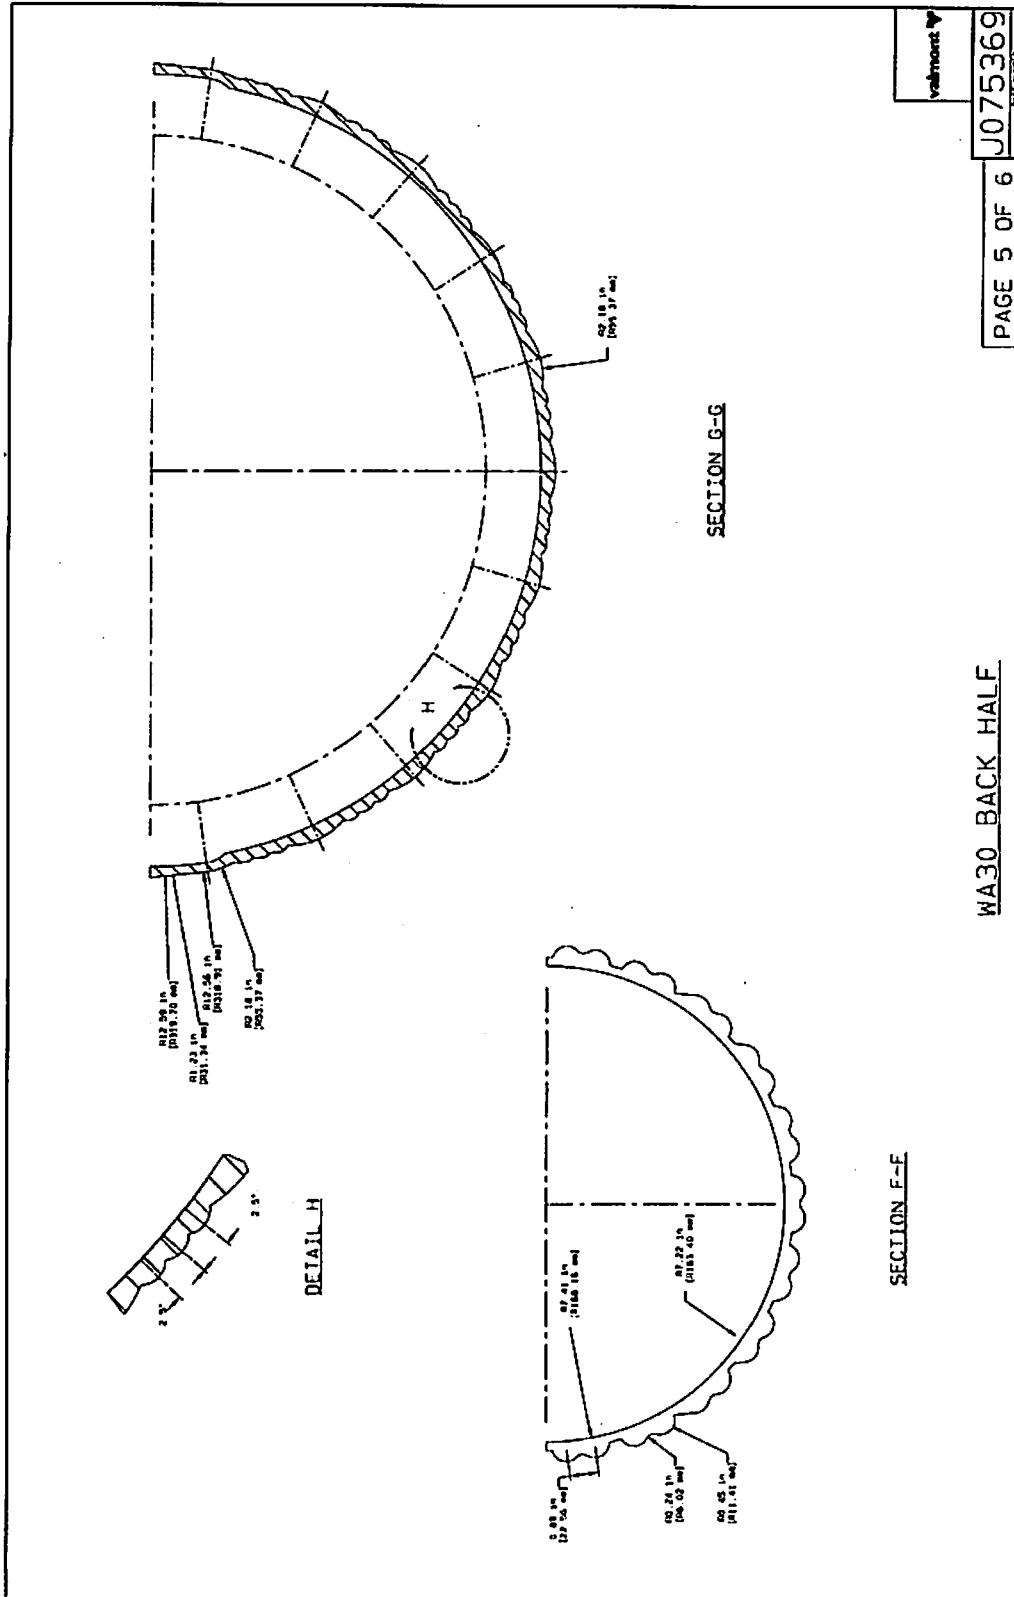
Washington-30 Clamshell Base Details, Test No. LST-353-05
